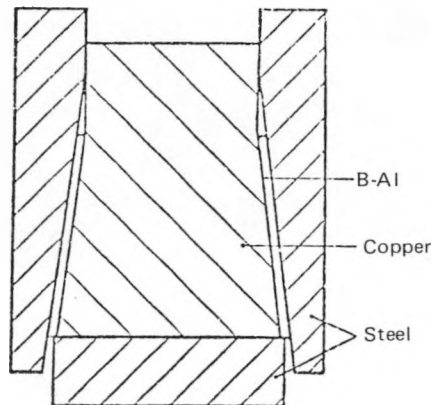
Die arrangement for hot-pressing boron-aluminum conical shapes
